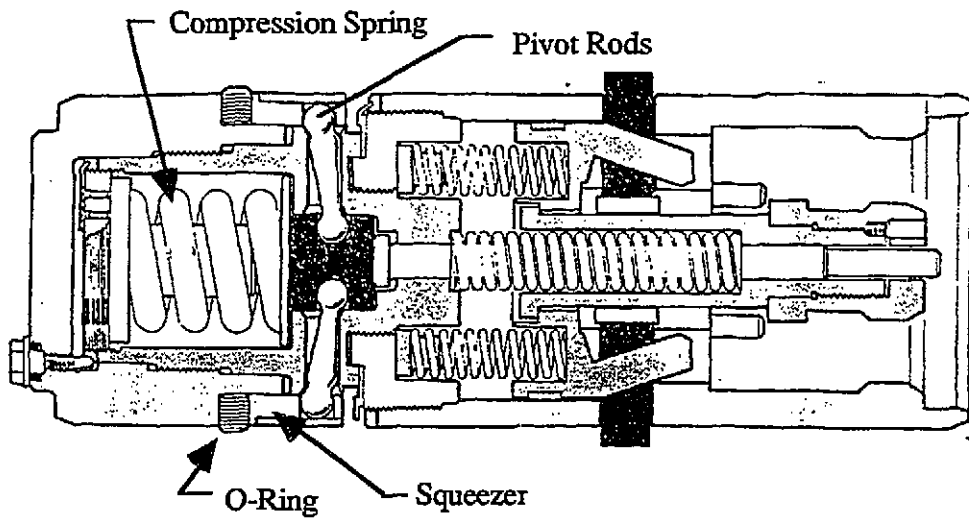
FUELLING MACHINE SNOT SEAL SHOWING O-RING
